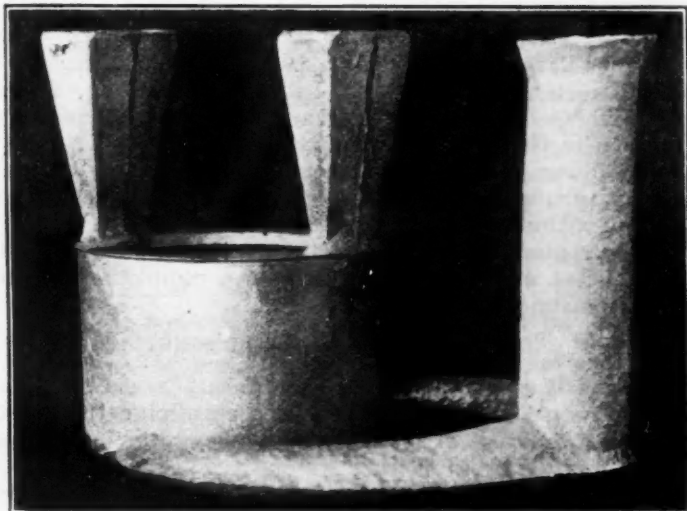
AIR-COOLED ENGINE-PISTON CASTING IN WHICH THE HORSESHOE GATE LED INTO THE LAND SECTION
